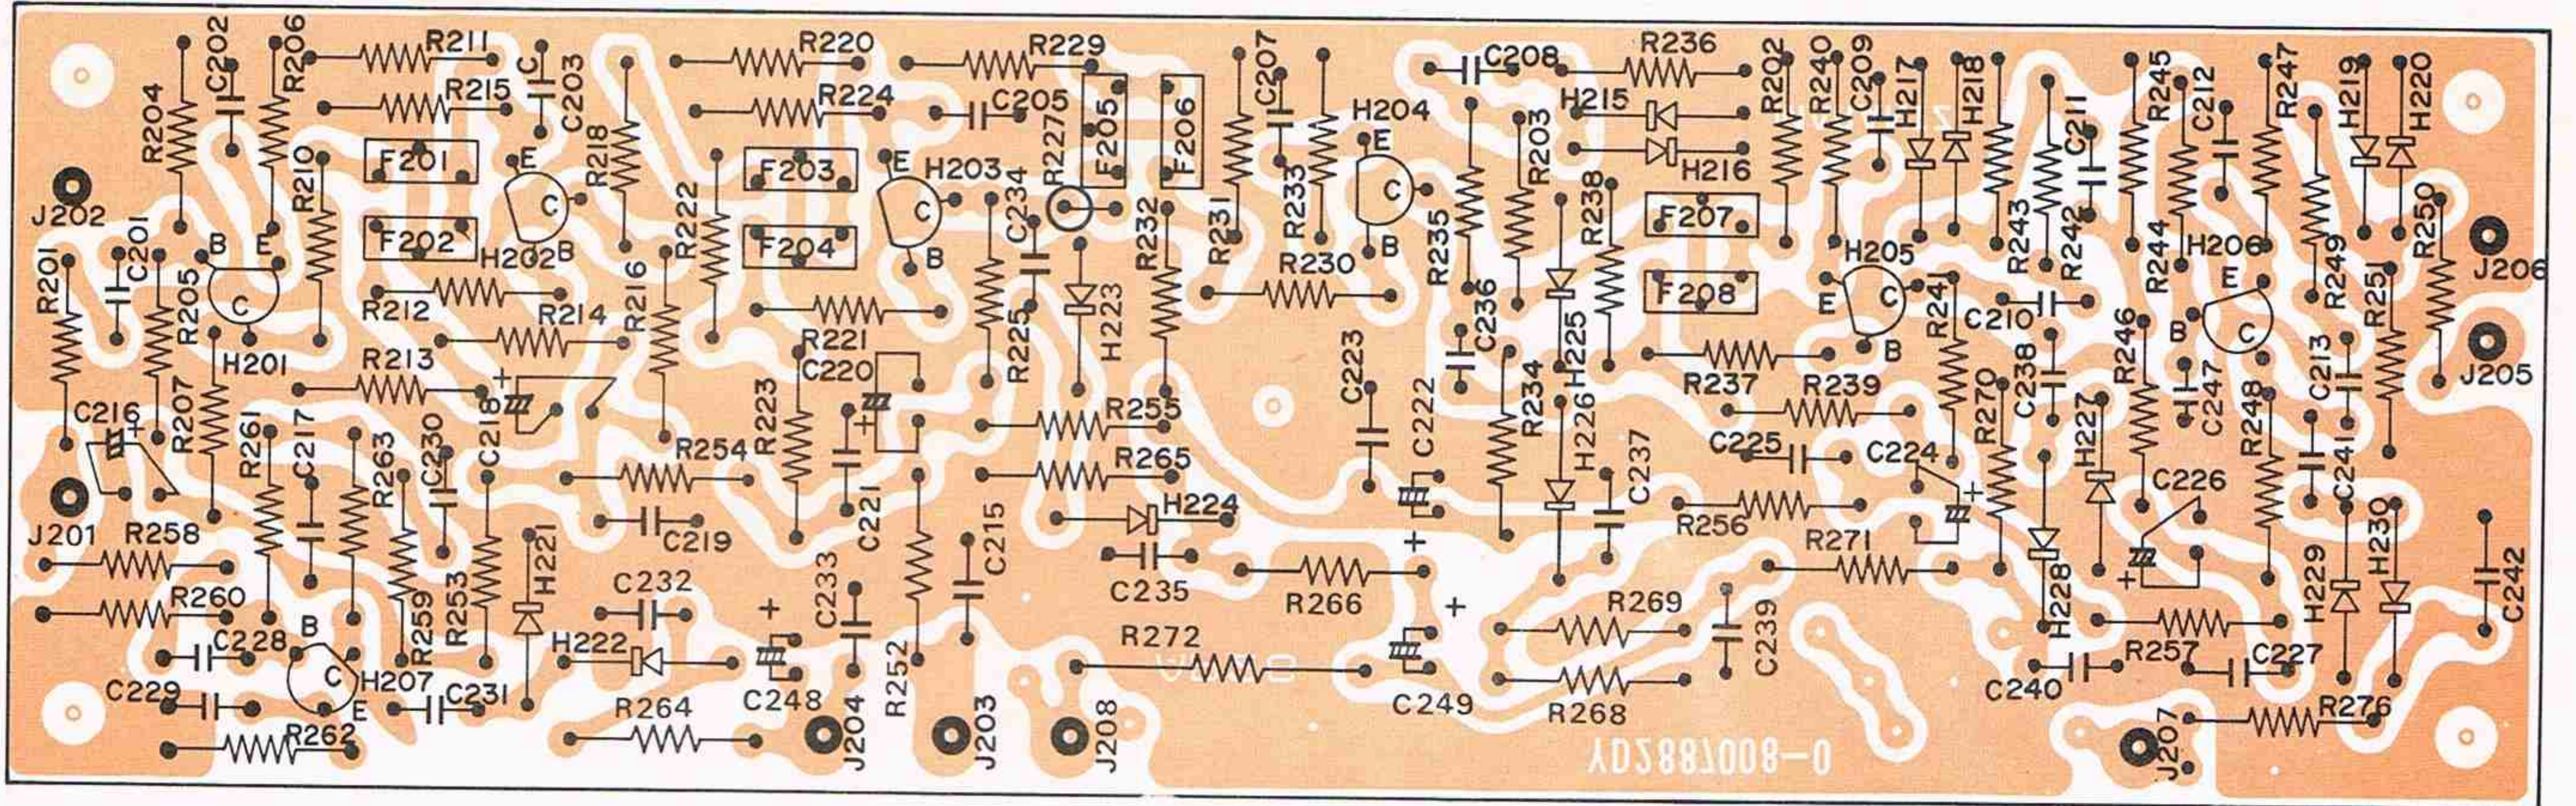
FM IF Amplifier Assembly P200 Component Locations
